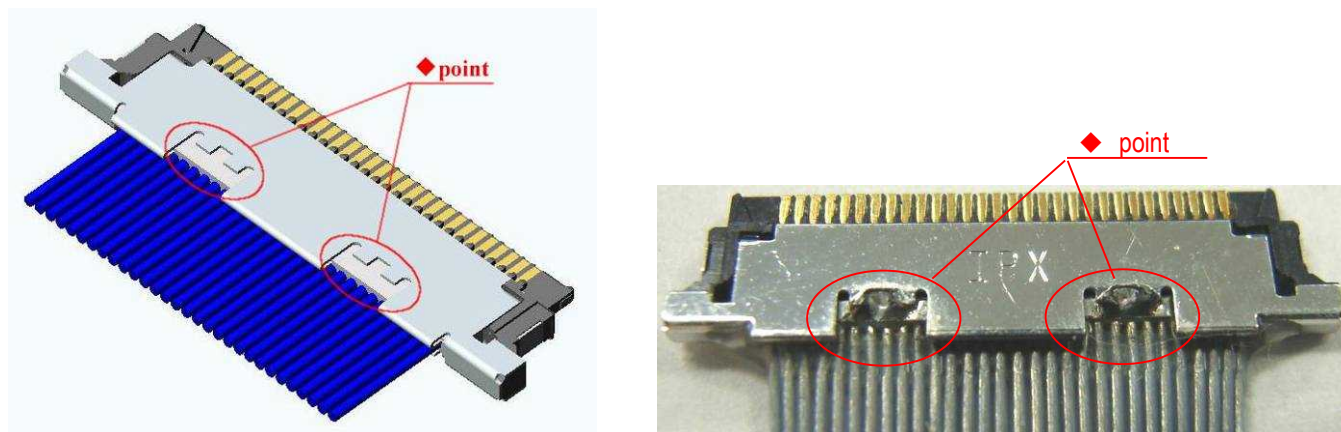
Soldering of SHELL A and GND BAR (SGC Cable only)
